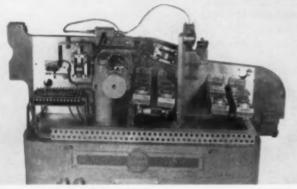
& 5. (top) An automatic gear checker designed to check shaper-cut gears. The parts are fed into the gage at the right and are sorted according to their measured accuracy. (above) Rear view of the checker for shaper-cut gears with cover removed.
